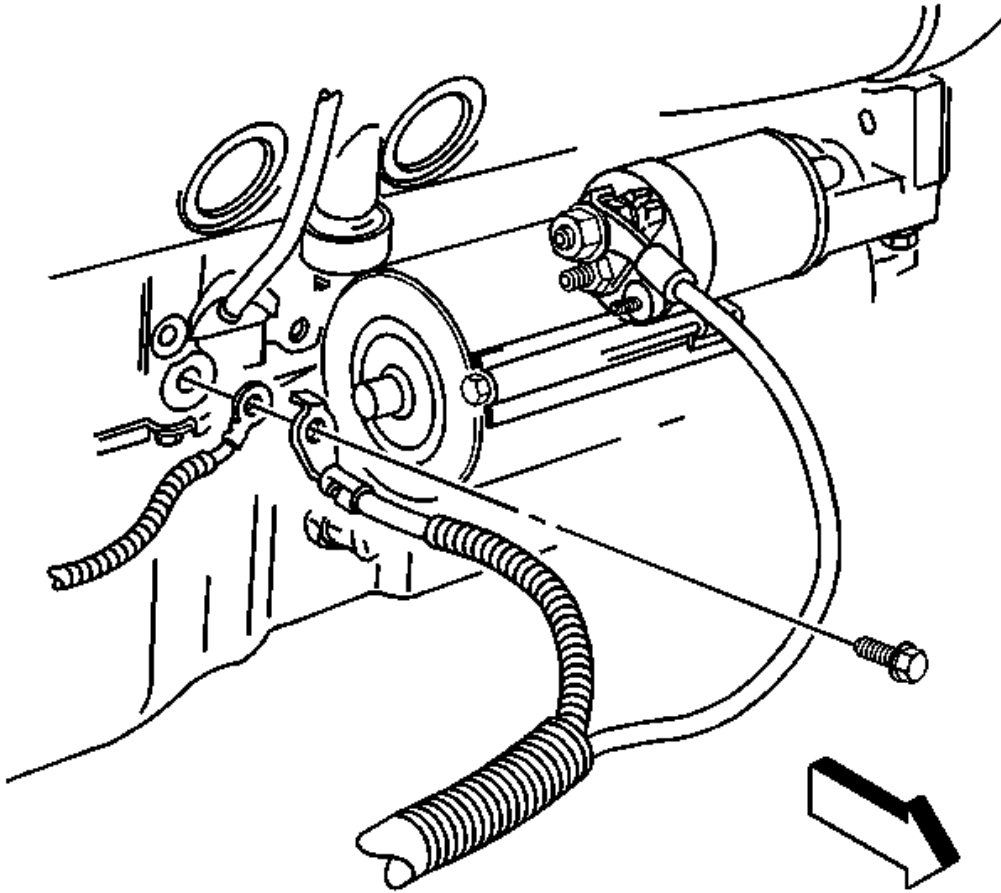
View of Battery Negative Cable & Engine Harness Ground Lead Bolt
